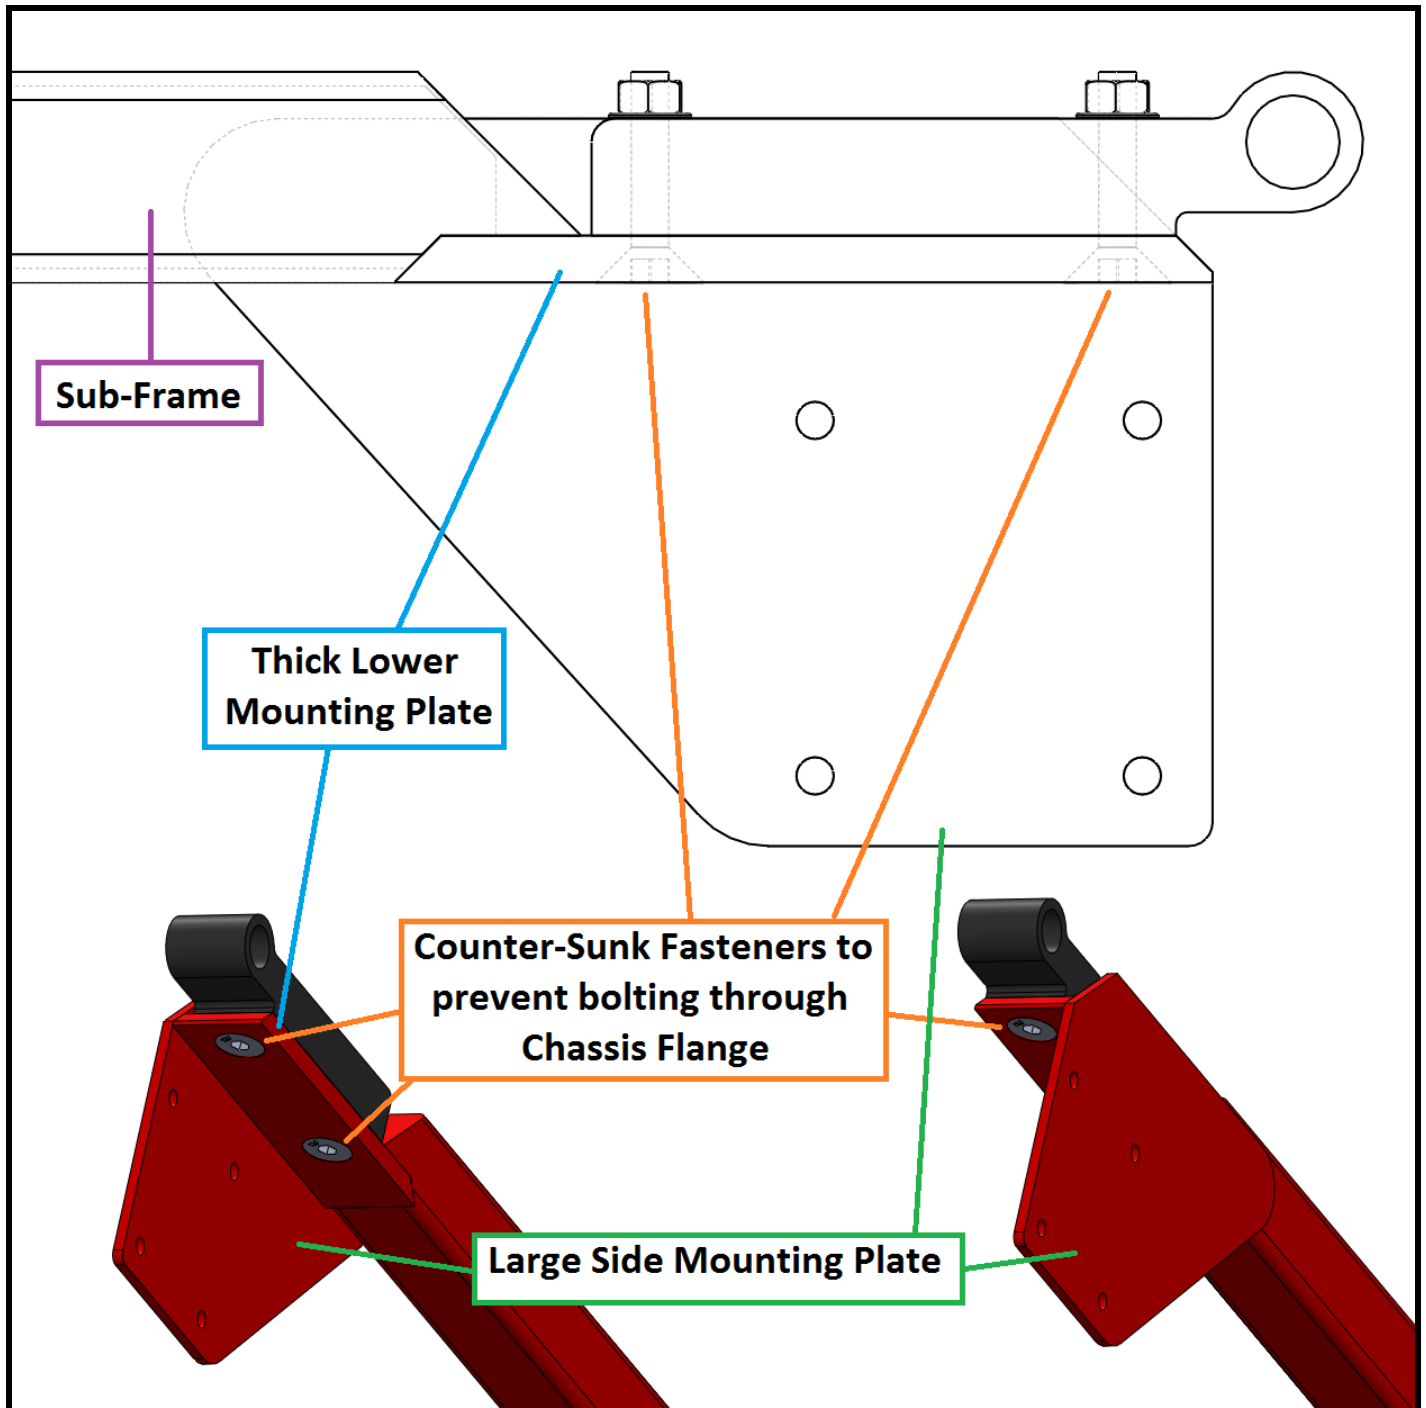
LOAD CELLS WITH MODIFIED SUB-FRAME, LOWER MOUNTING PLATES AND LARGER SIDE MOUNTING PLATES
